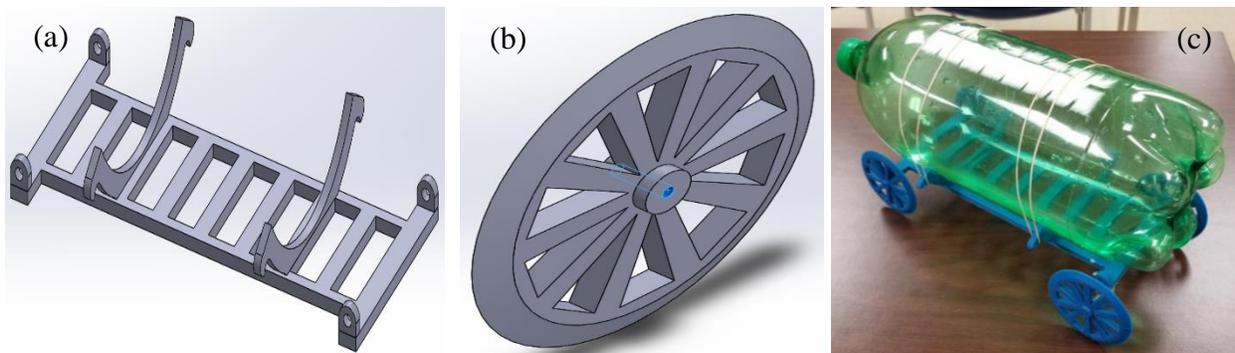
3-dimensional CAD design of a modified (a) chassis, (b) wheel and (c) re-designed assembly of 3D printed chassis and wheels.
